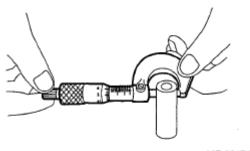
Checking Clearance Between Piston Pin And Bushing Courtesy of SUBARU OF AMERICA, INC.
